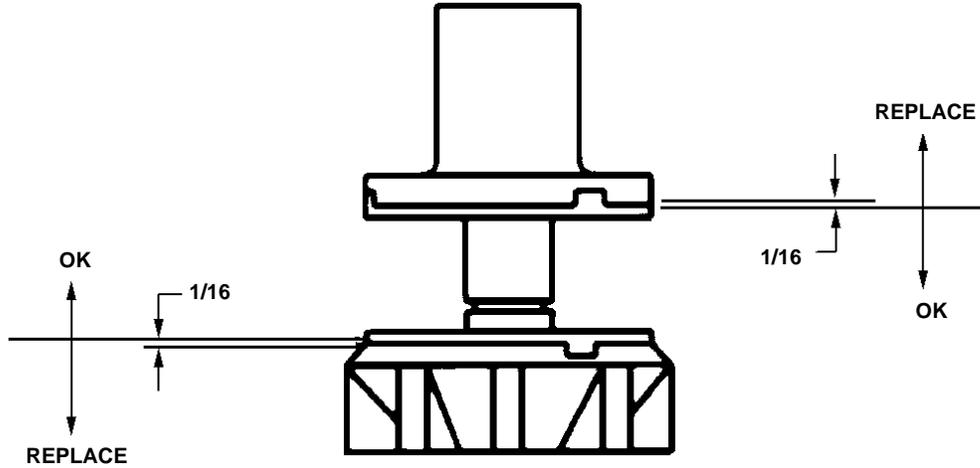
UPPER BEARING AND AUGER ASSEMBLY
